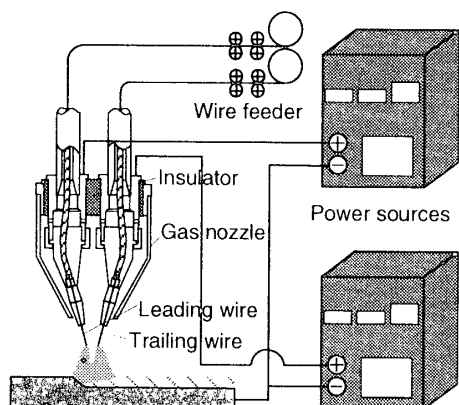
Schematic diagram of Tandem GMA welding process
